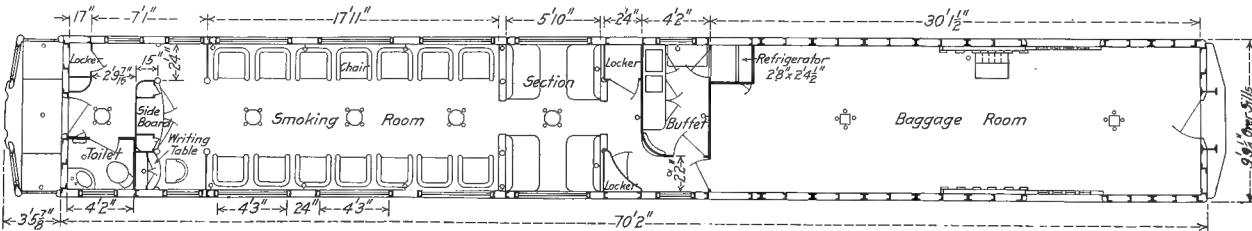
Floor Plan of Western Pacific Baggage, Parlor and Library Car. Builder, The Barney & Smith Car Co.
